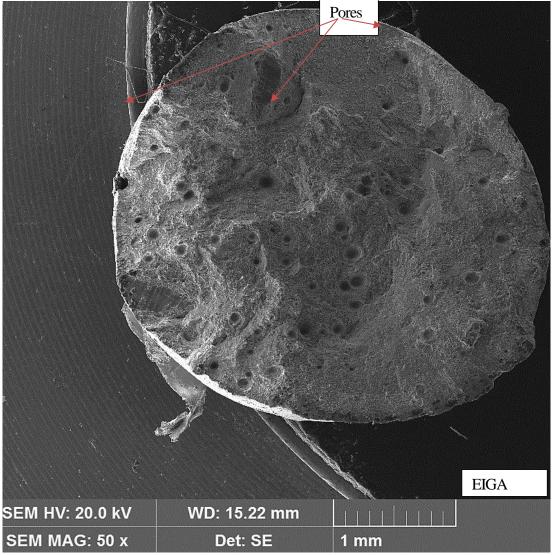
Fractograpgy of EIGA as-built specimens with indications of gas pores
